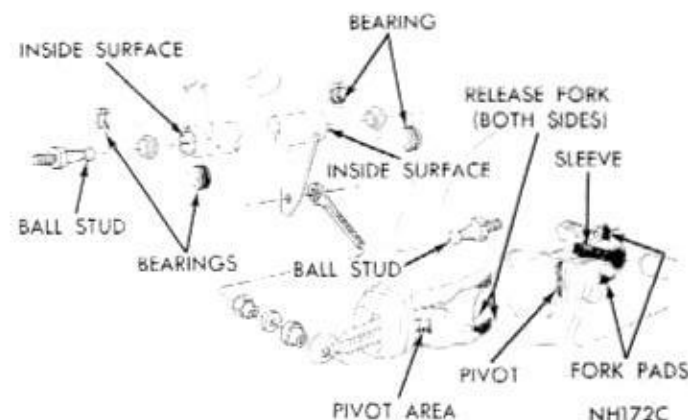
Clutch Torque Shaft Bearings and Linkage
